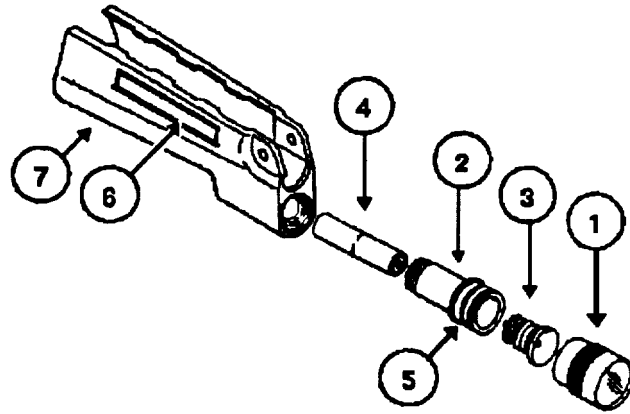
Disassembled Handguard And Tactical Light Assembly
